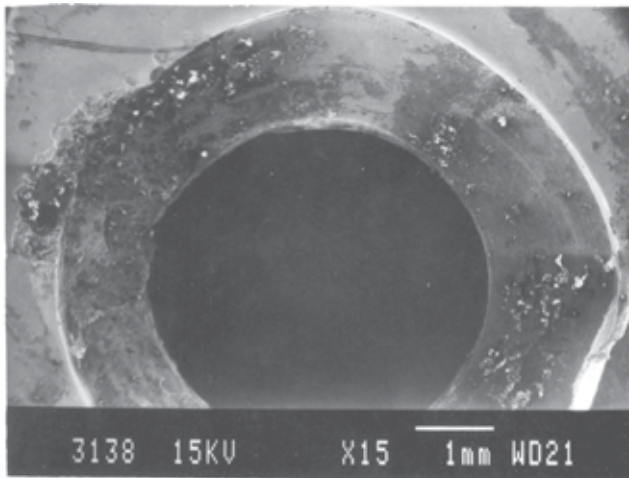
Corrosion at the counter sunk of screw hole as seen at higher magnification
